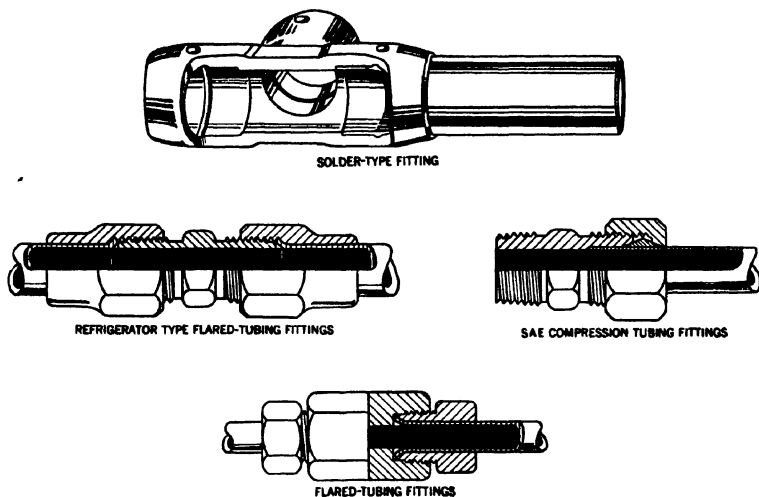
COPPER OR BRASS TUBING FITTINGS
